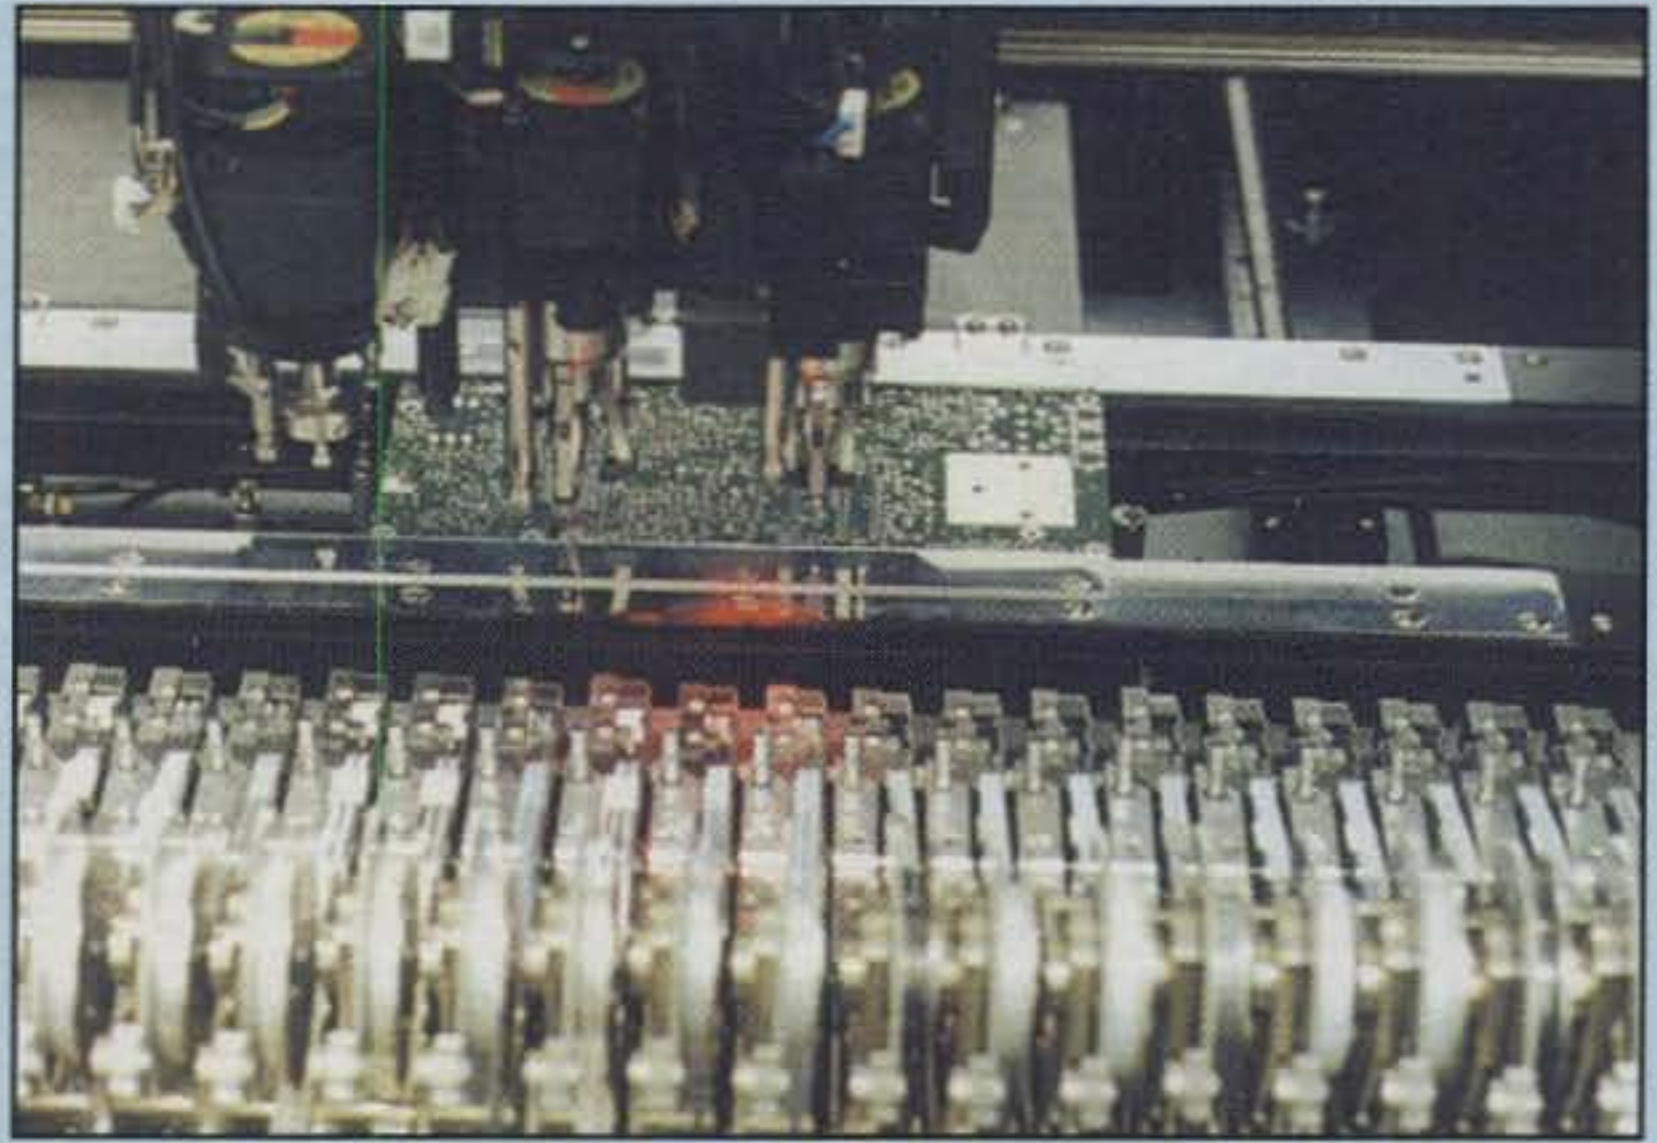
This surface-mount machine automatically selects parts and places them in specified locations on a circuit board in preparation for surface-mount soldering.
